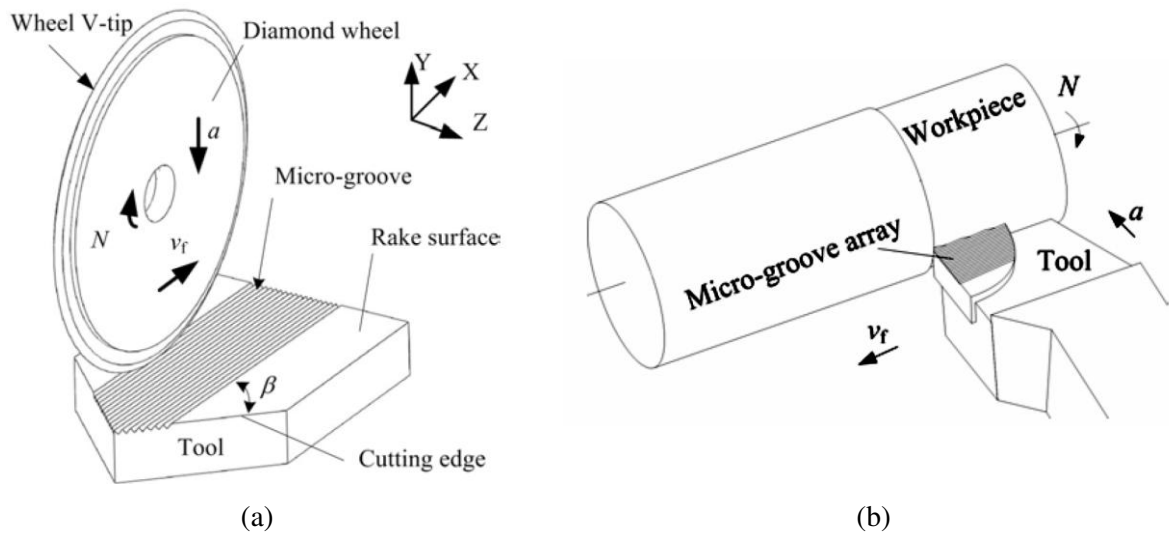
(a) Micro-grinding of a micro-groove array on tool rake surface (b) Dry turning using a micro-grooved tool (Xie et al., 2012).
